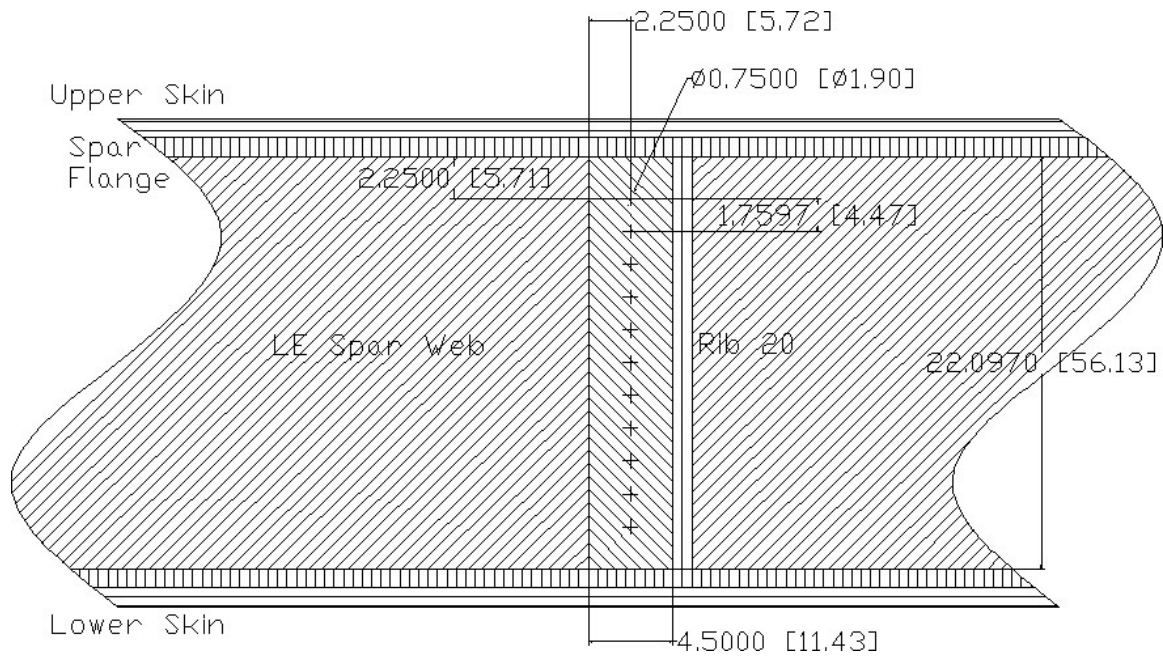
Rib-to-Spar Joint General Arrangement, Rib 20, Plan View. All Dimensions are in inches [cm]
